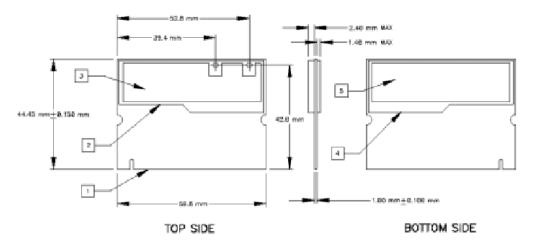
Mechanical Drawing, MiniPCI Type IIIB
